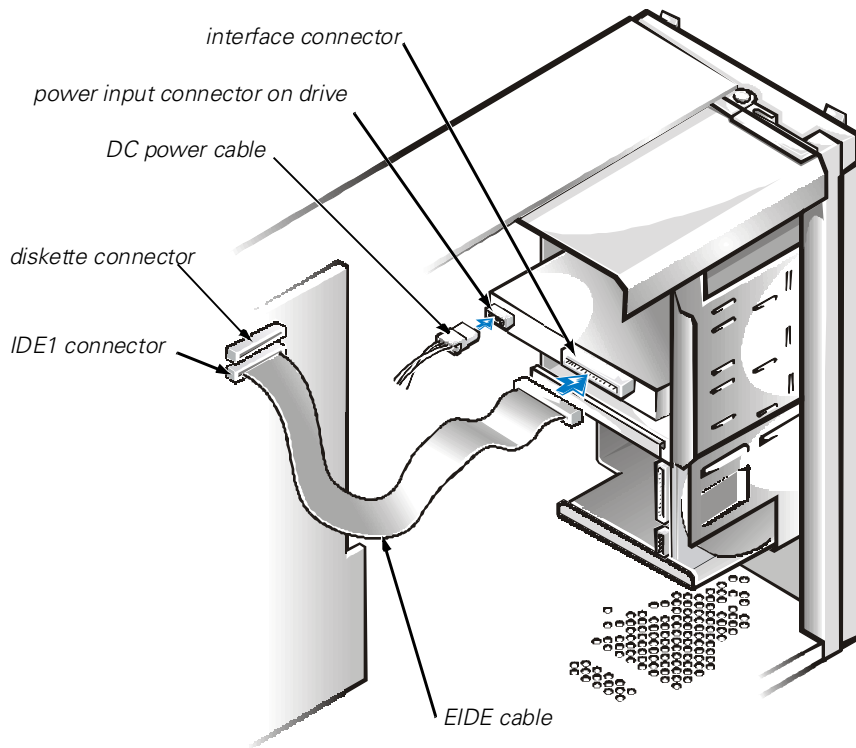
Attaching EIDE CD-ROM Drive Cables
